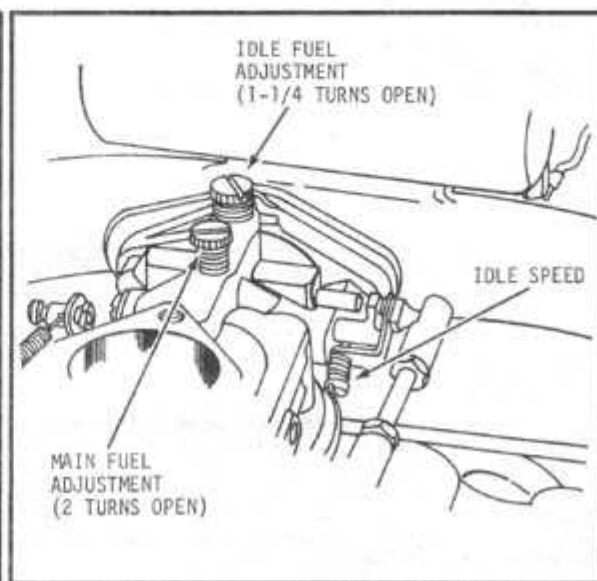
CARBURETOR ADJUSTMENT POINTS
